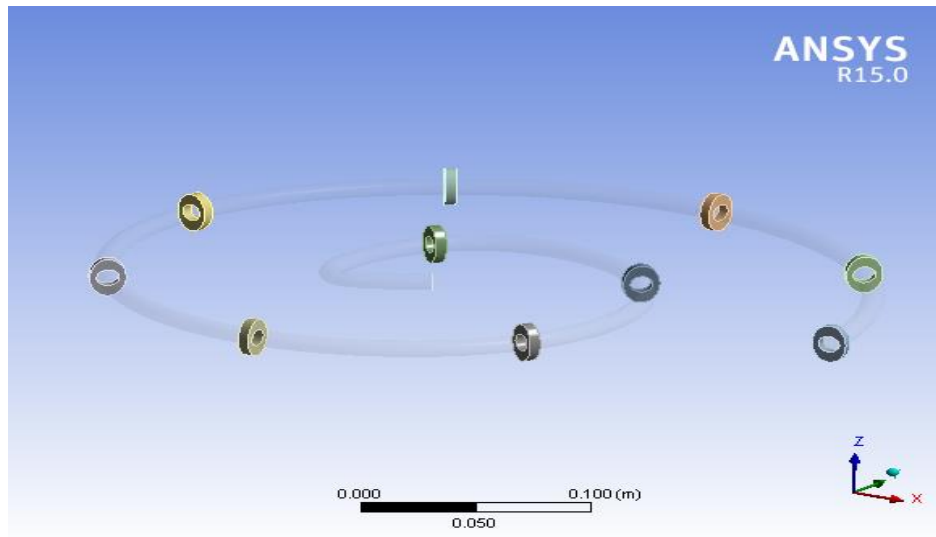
showing the geometric dimension of the spiral radiator with elliptical circumferential fins.
